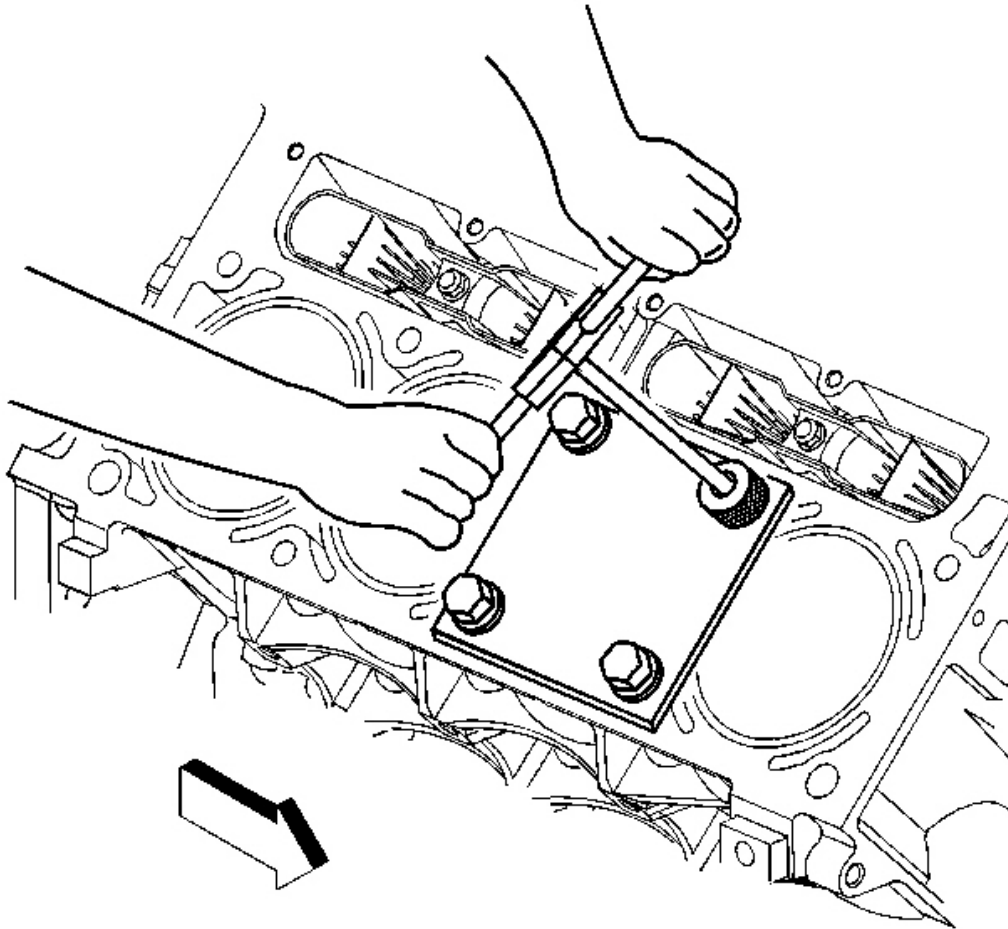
Tapping Threads Of Drilled Hole Using Tapping Wrench
